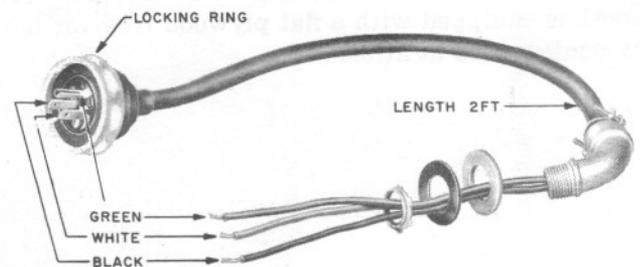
KS-14611, List 20 Power Cord Assembly, Upper Entrance
